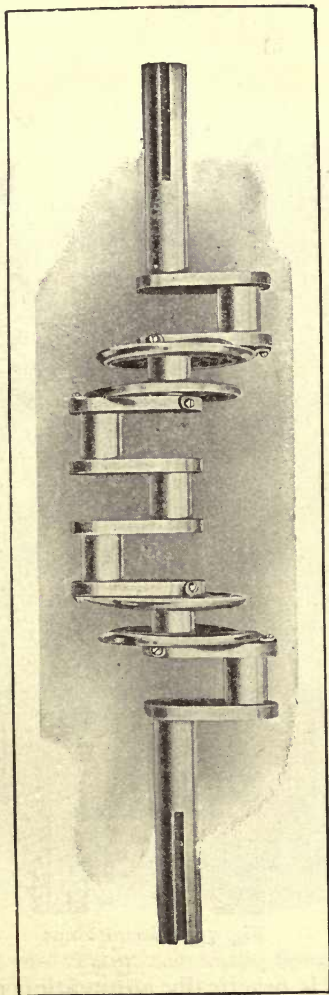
“Buffalo” Oiling Rings on Shaft
